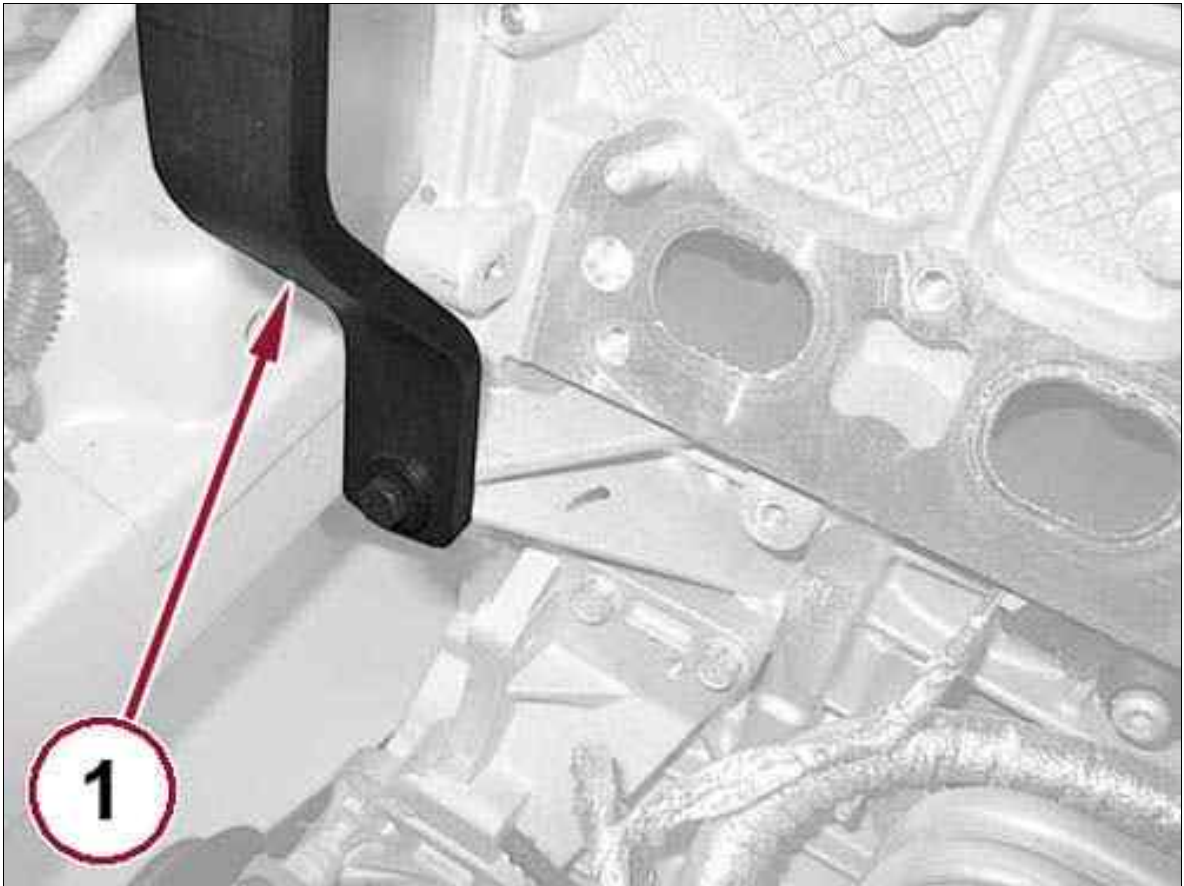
Wiring Retaining Bracket To Cylinder Head & Bolt
